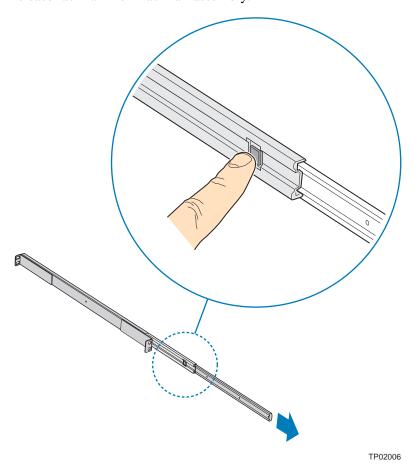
Detaching Inner Rack Rail from Rack Rail Assembly
